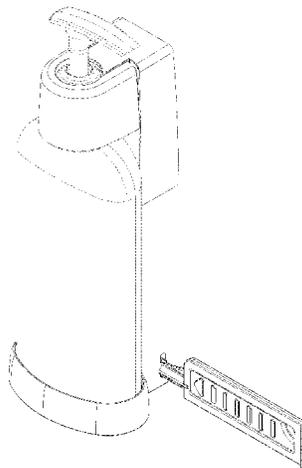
is a front exploded perspective view of the bottle mount assembly with insert tool shown in a position of use with an exemplary bottle, wherein the insert tool is inserted in the left side of the mount assembly, and the top portion of the mount assembly is disassembled;
